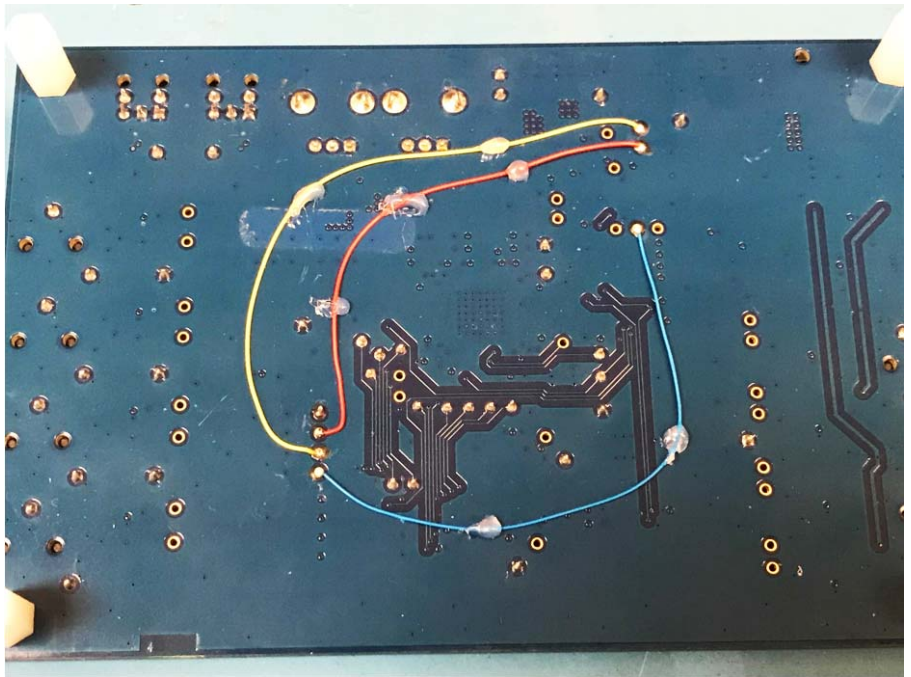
Jumper Wires Soldered on Bottom of the PCB.
